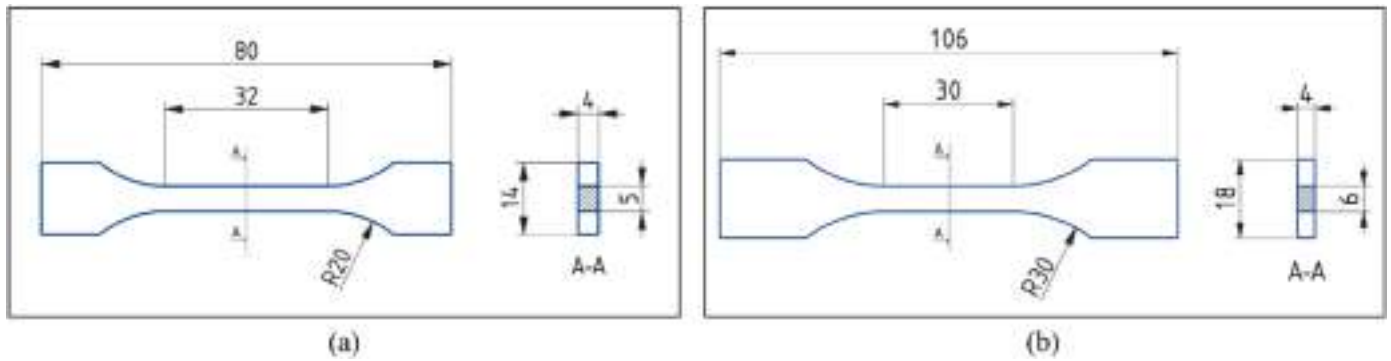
Dimensional drawings of the tensile specimens for (a) single material and (b) bimetallic tests.
